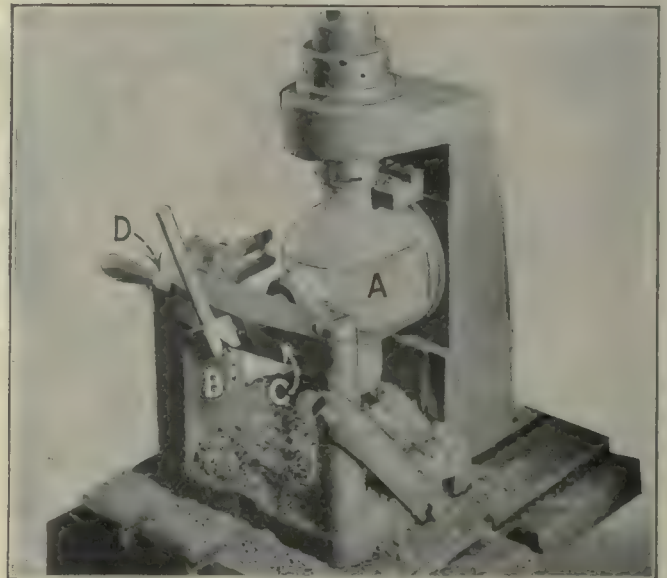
JIG WITH TRIGGER RELEASE OF CLAMPING ARM
